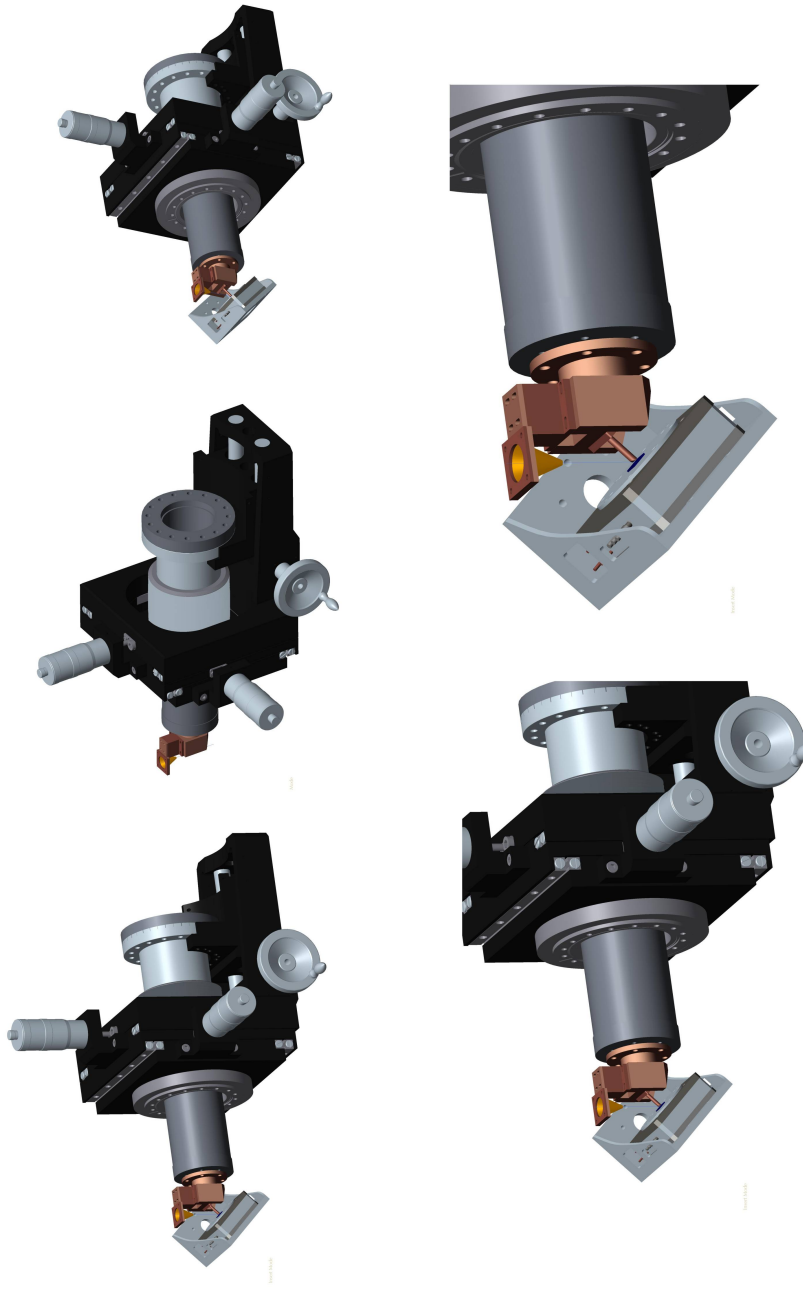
Sketches of the *reflection detector mounting* from different view directions and with different magnifications. The stage will be mounted from outside on the sample chamber (see section 6.3.3).
